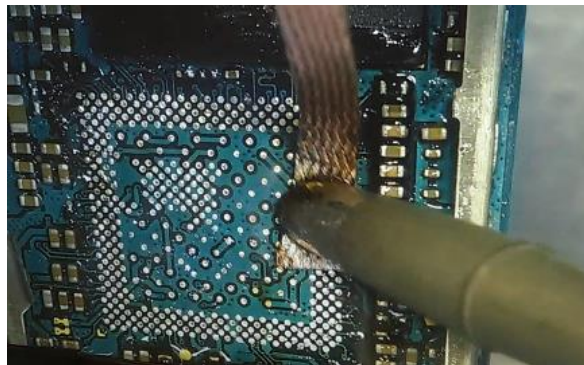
Photo of cleaning of soldering pads by copper wick together with hot solder tip
